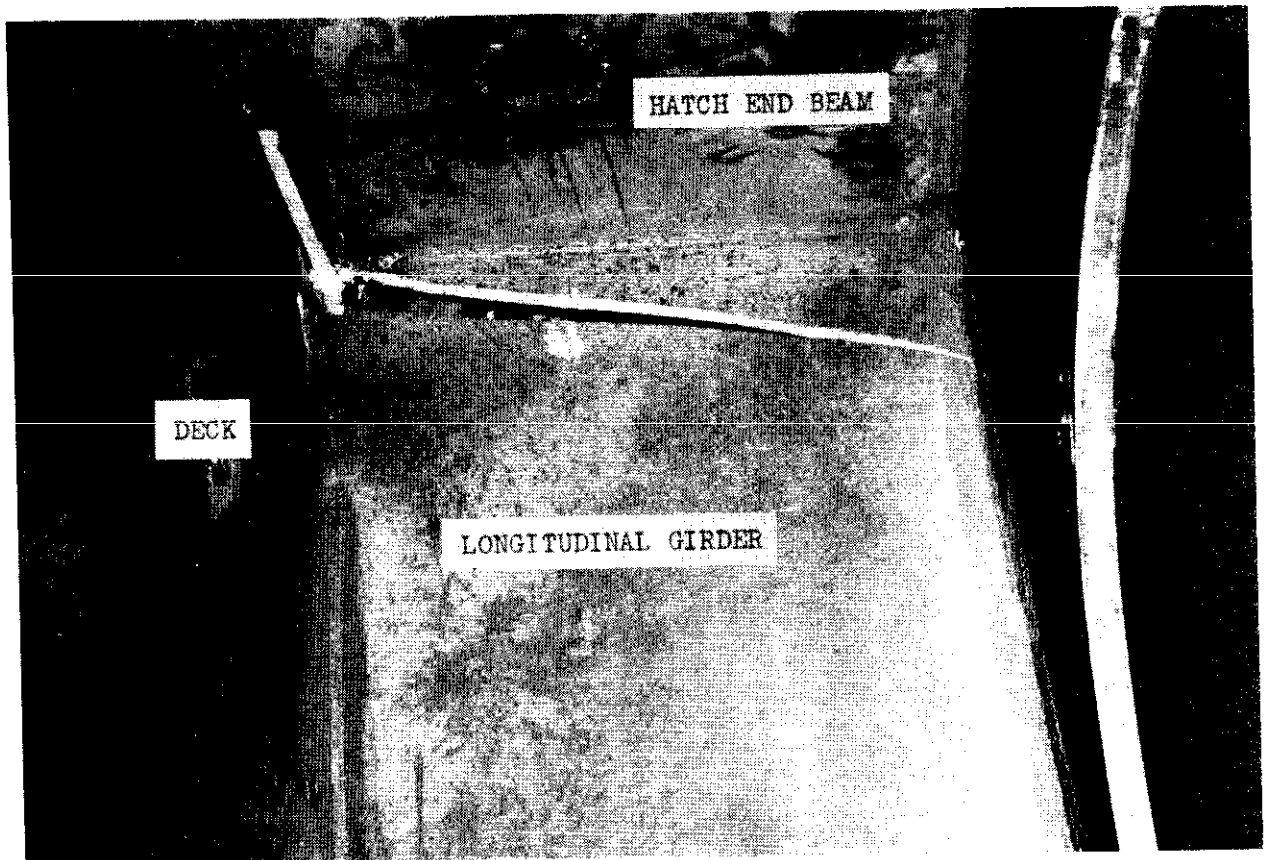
Specimen 34: View from below deck, outboard and forward of hatch end beam
